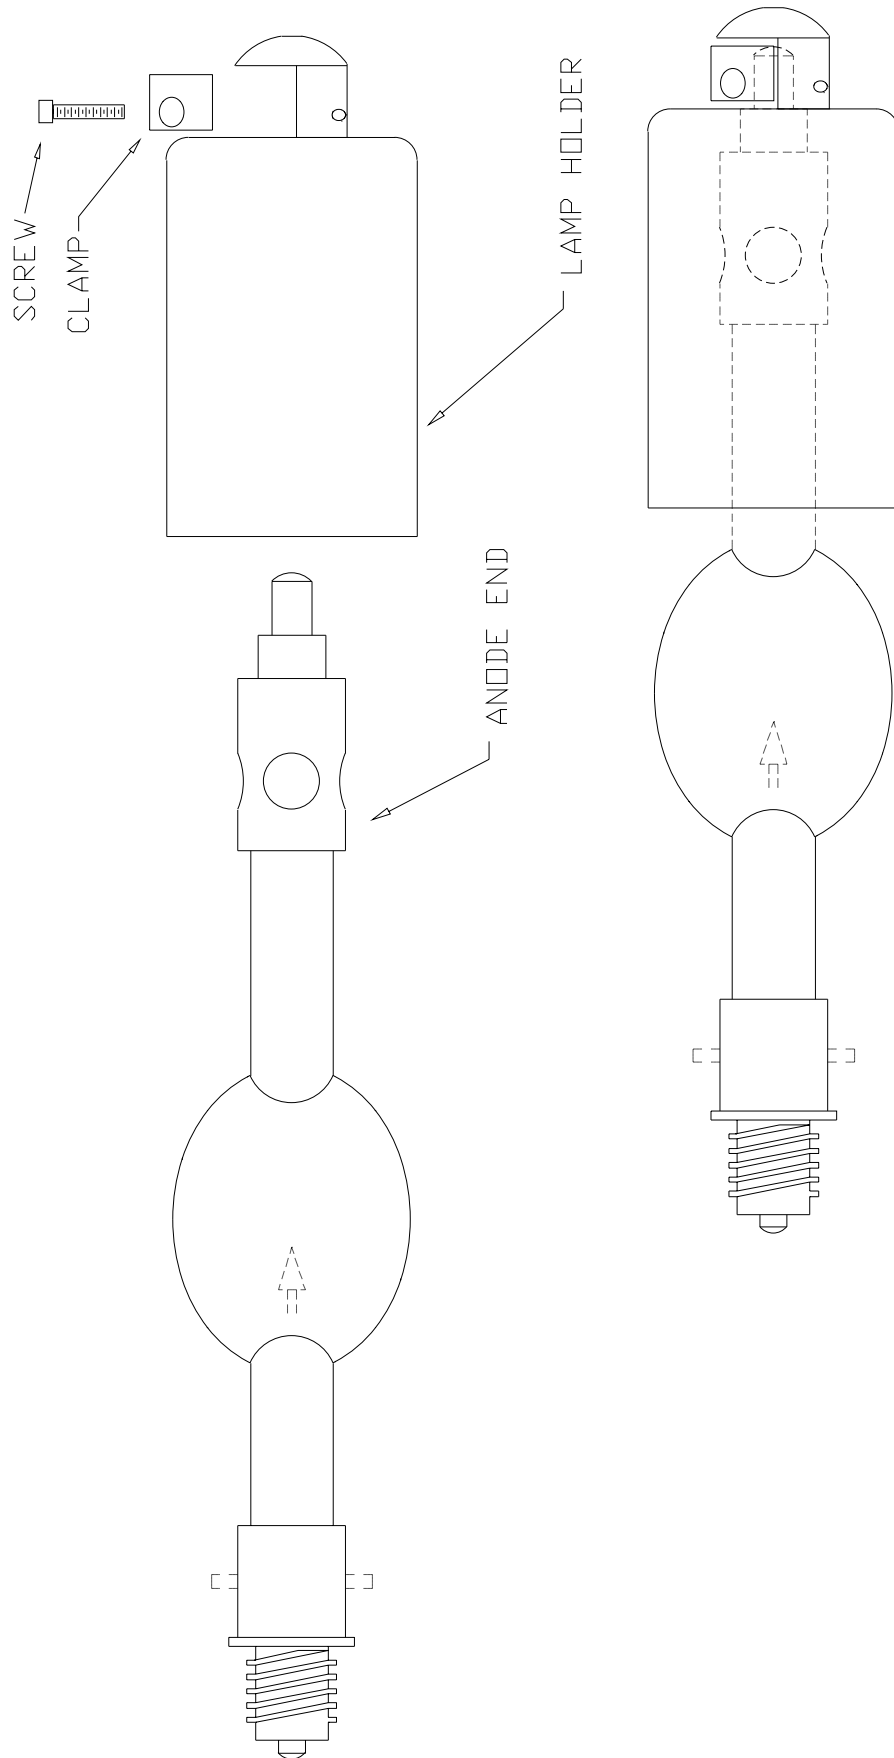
FRONT LAMP HOLDER ASSEMBLY
